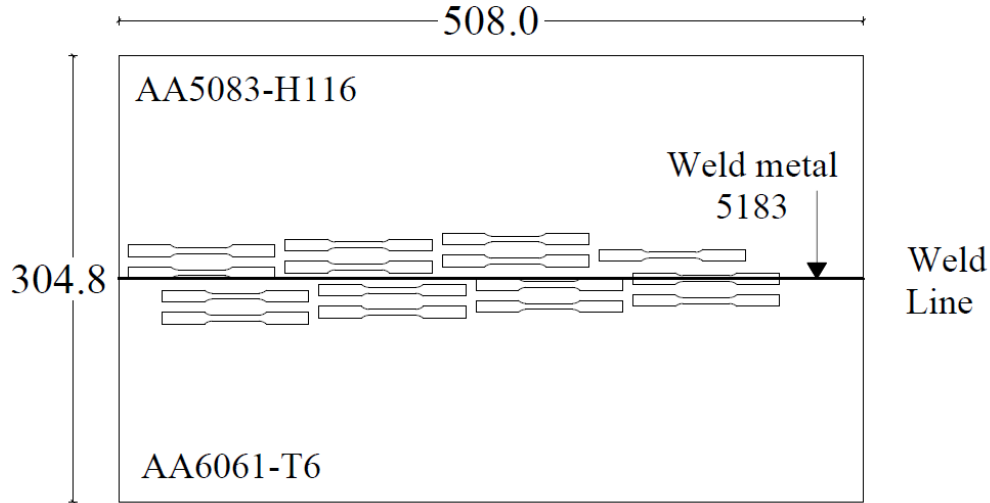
Dimensions of welded specimen for coupon testing in millimeters.
